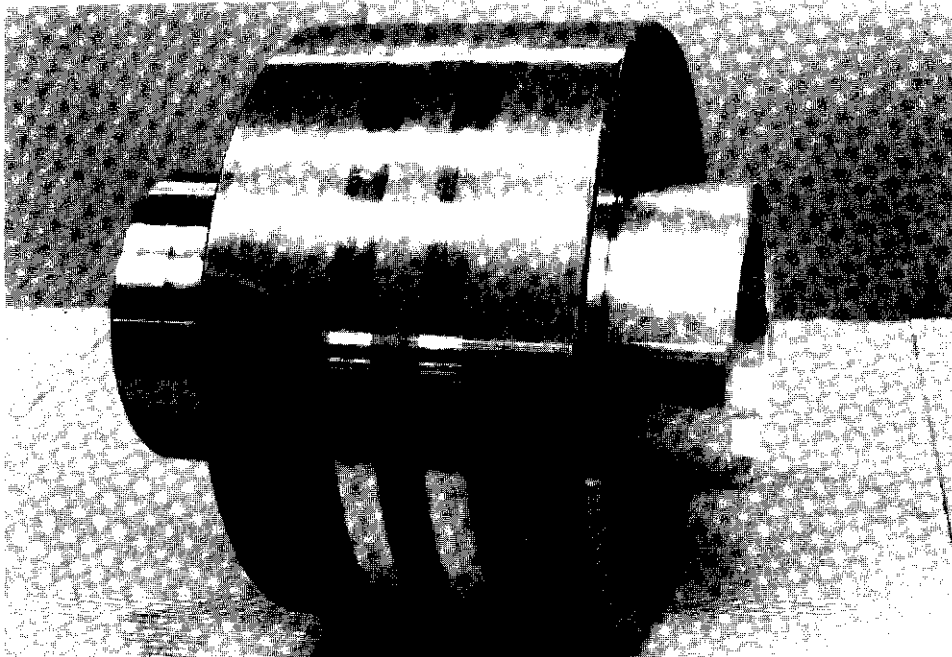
Inner ring (on left) and auxiliary inner ring (on right).
